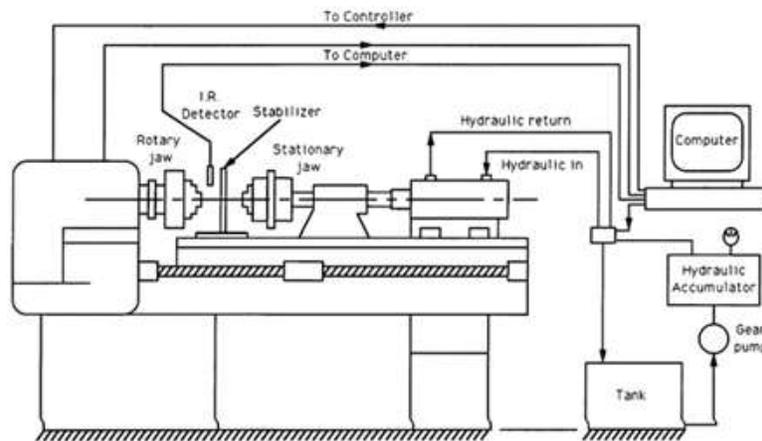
Shows a schematic view of friction welding equipment (friction welder) [1]
